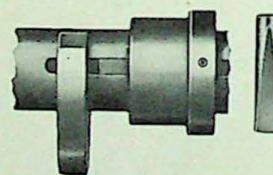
Cam slips easily into place on shaft with slots in alignment with offset key ways.
